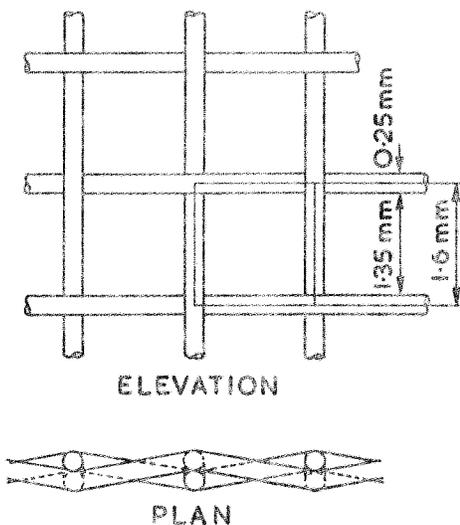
Portion of the gauze on an enlarged scale (Elevation and plan).
